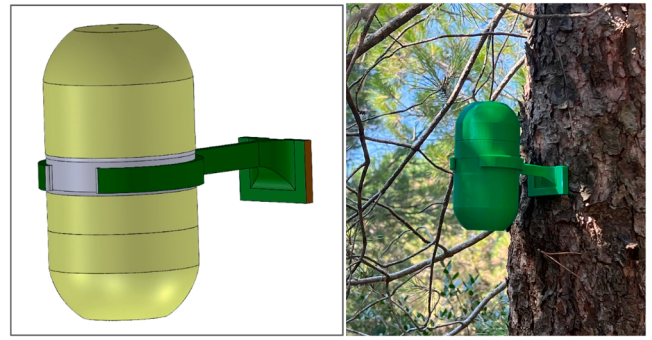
Left, the 3D enclosure design; Right, the 3D printed prototype.
